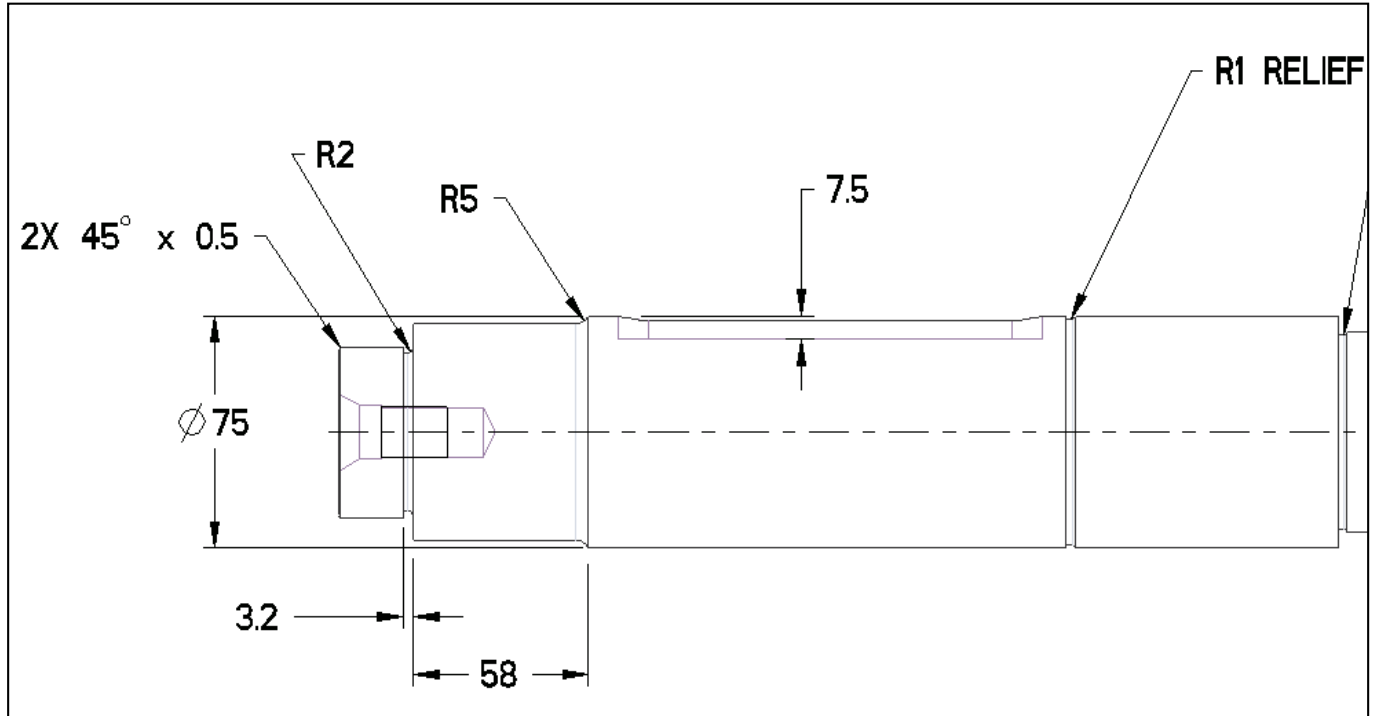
Coupling Shaft Drawing, Sheet One, Front View, Left Side
